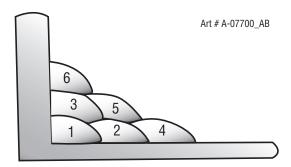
Multi-runs in HV Fillet Weld
